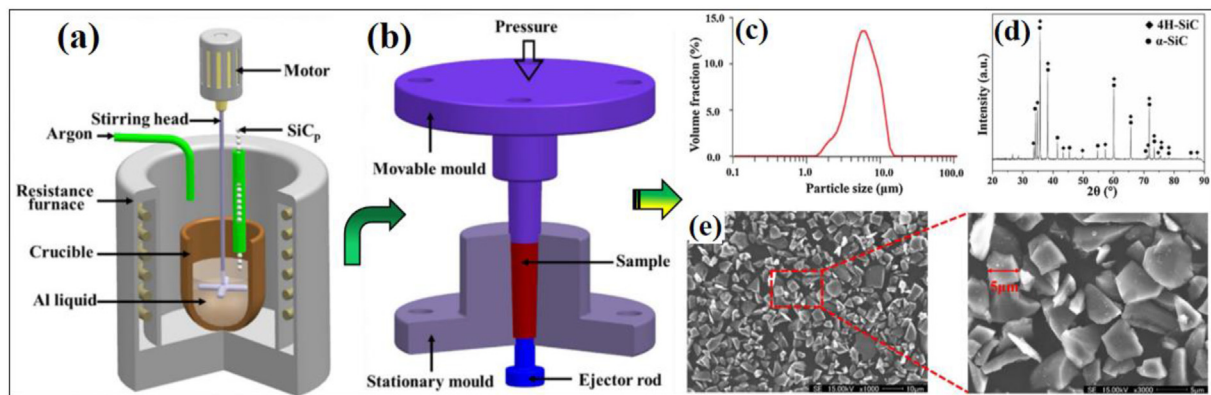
(a-b) The sketch of fabrication of the SiC_p/Al 6082 composites via squeeze casting; (c) SiC_p particle size; (d) XRD pattern; (e) morphology [51].
